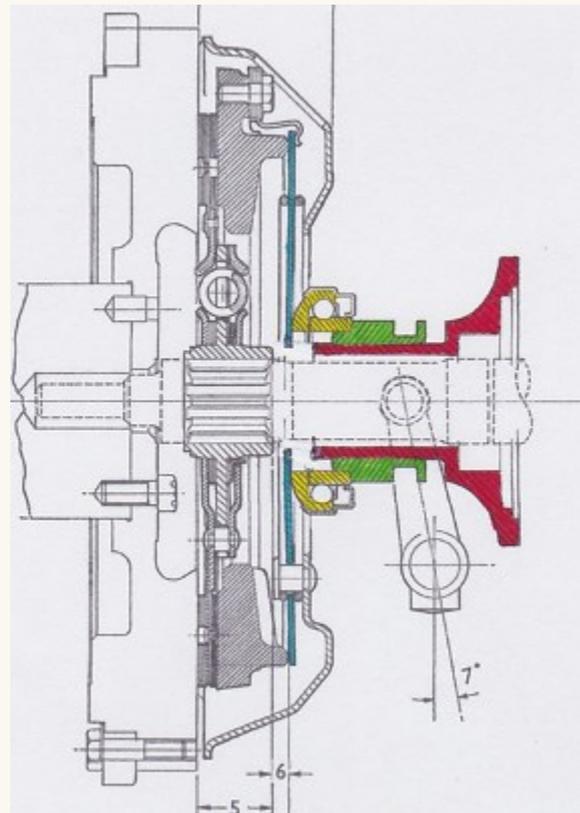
Modified Stag clutch release bearing & carrier with rubber mounted bearing.
